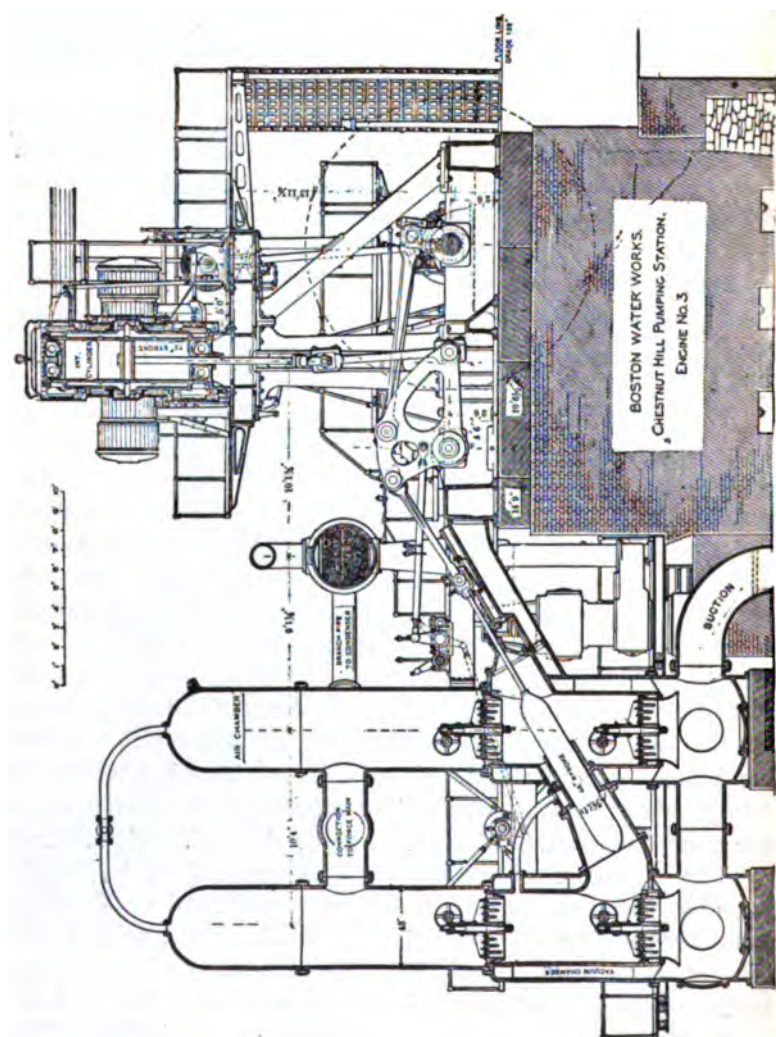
LEAVITT ENGINES WITH RIEDLER PUMPS.
